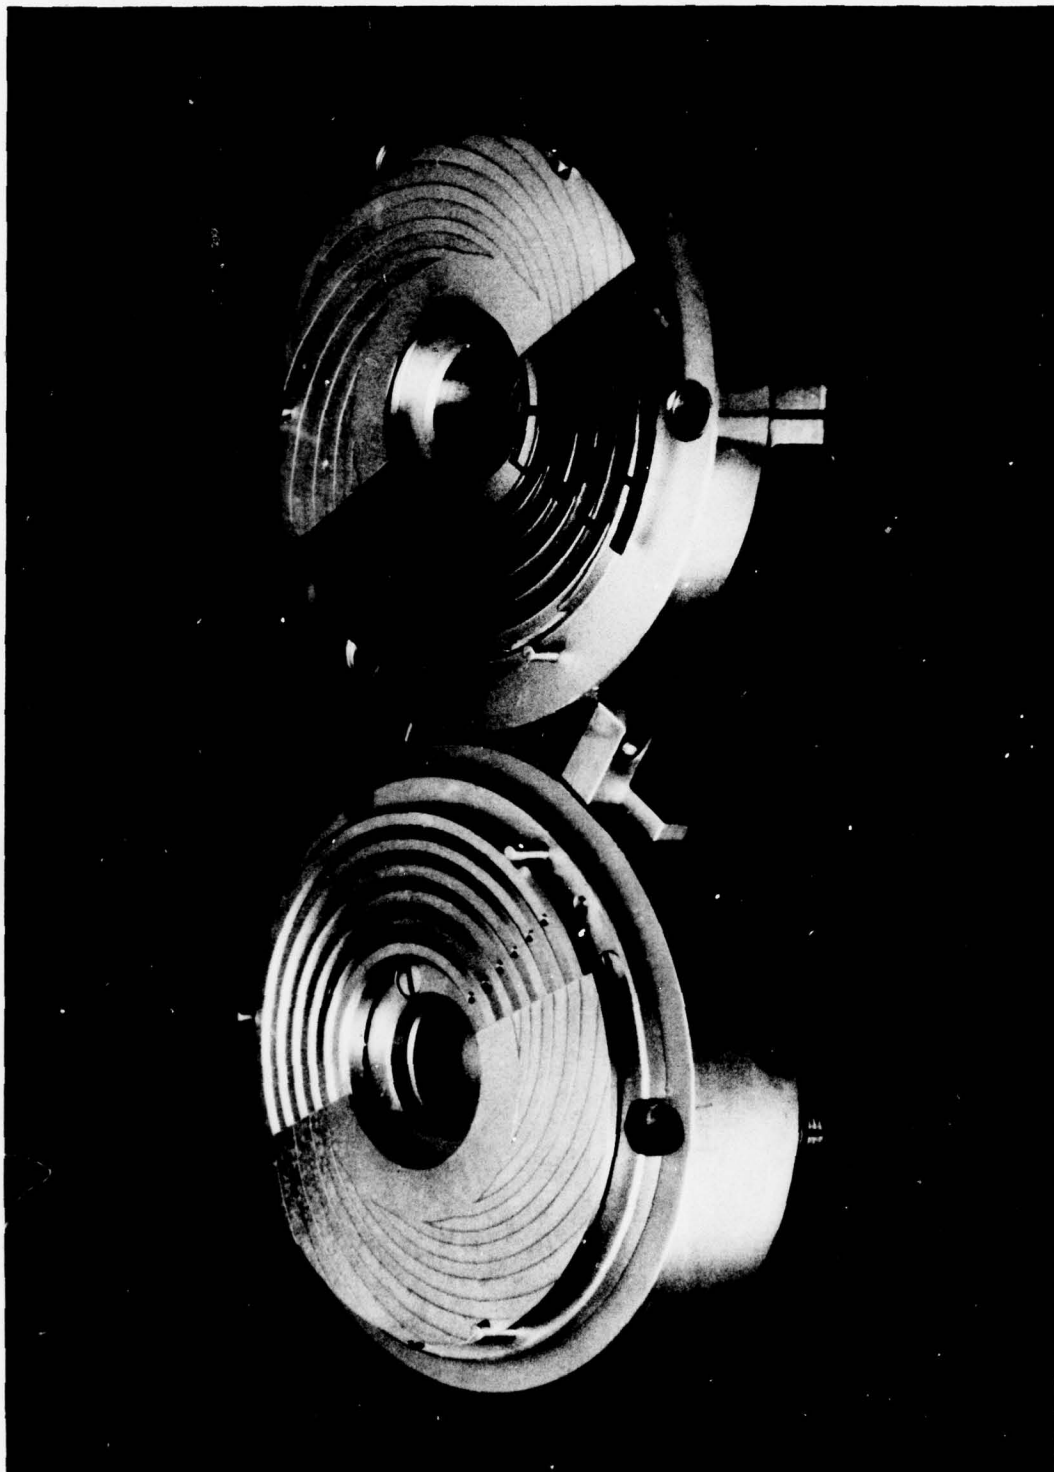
VIEW OF FLEXIBLE THRUST BEARINGS LLF-1T AND LLF-2T
